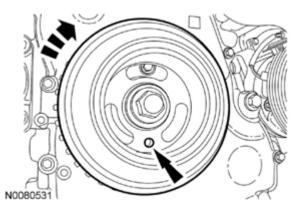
Positioning Crankshaft Pulley Hole At 6 O'Clock Position Courtesy of FORD MOTOR CO.
